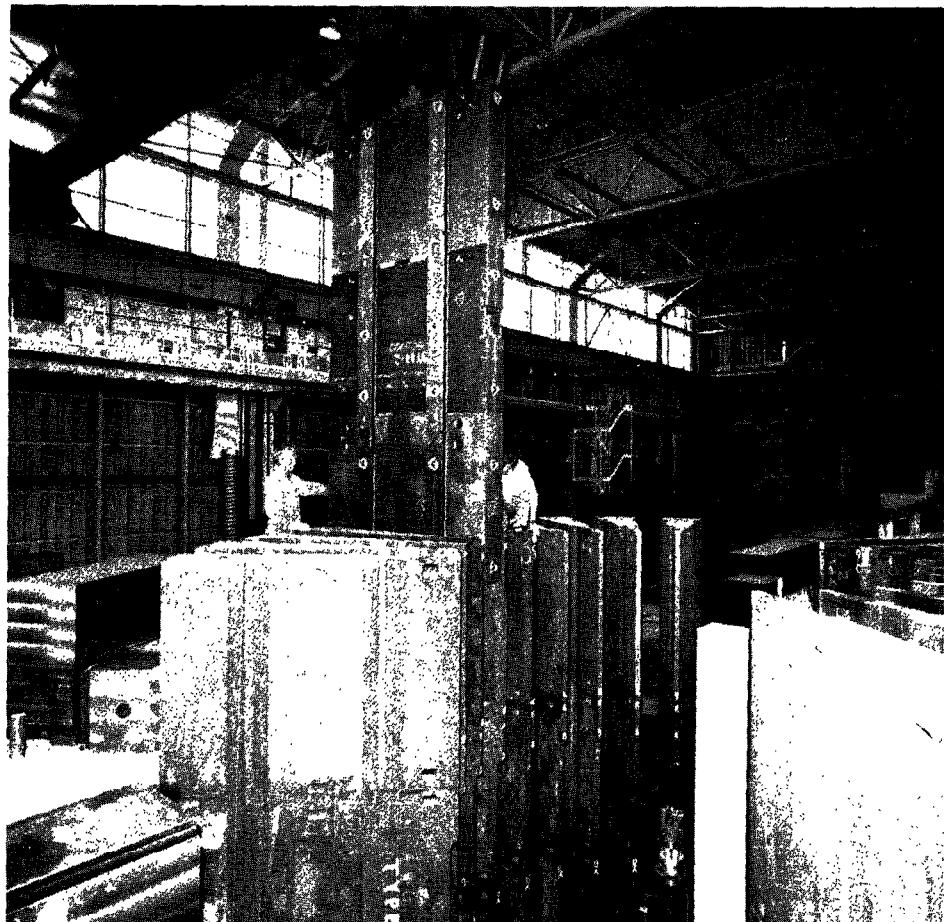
Whole Shutter Assembly in Mounting Tests with Target Station Shielding.
